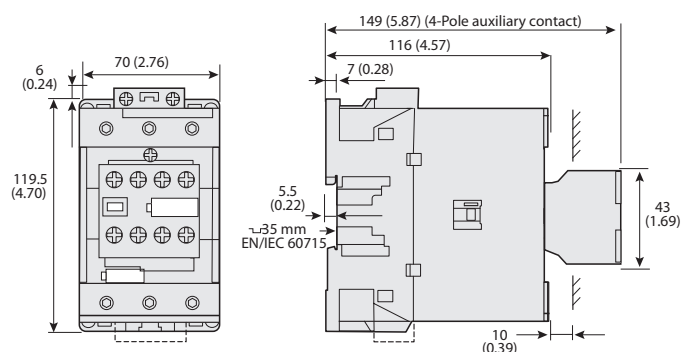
104-E80...104-E96 Reversing 3-Pole Contactors
